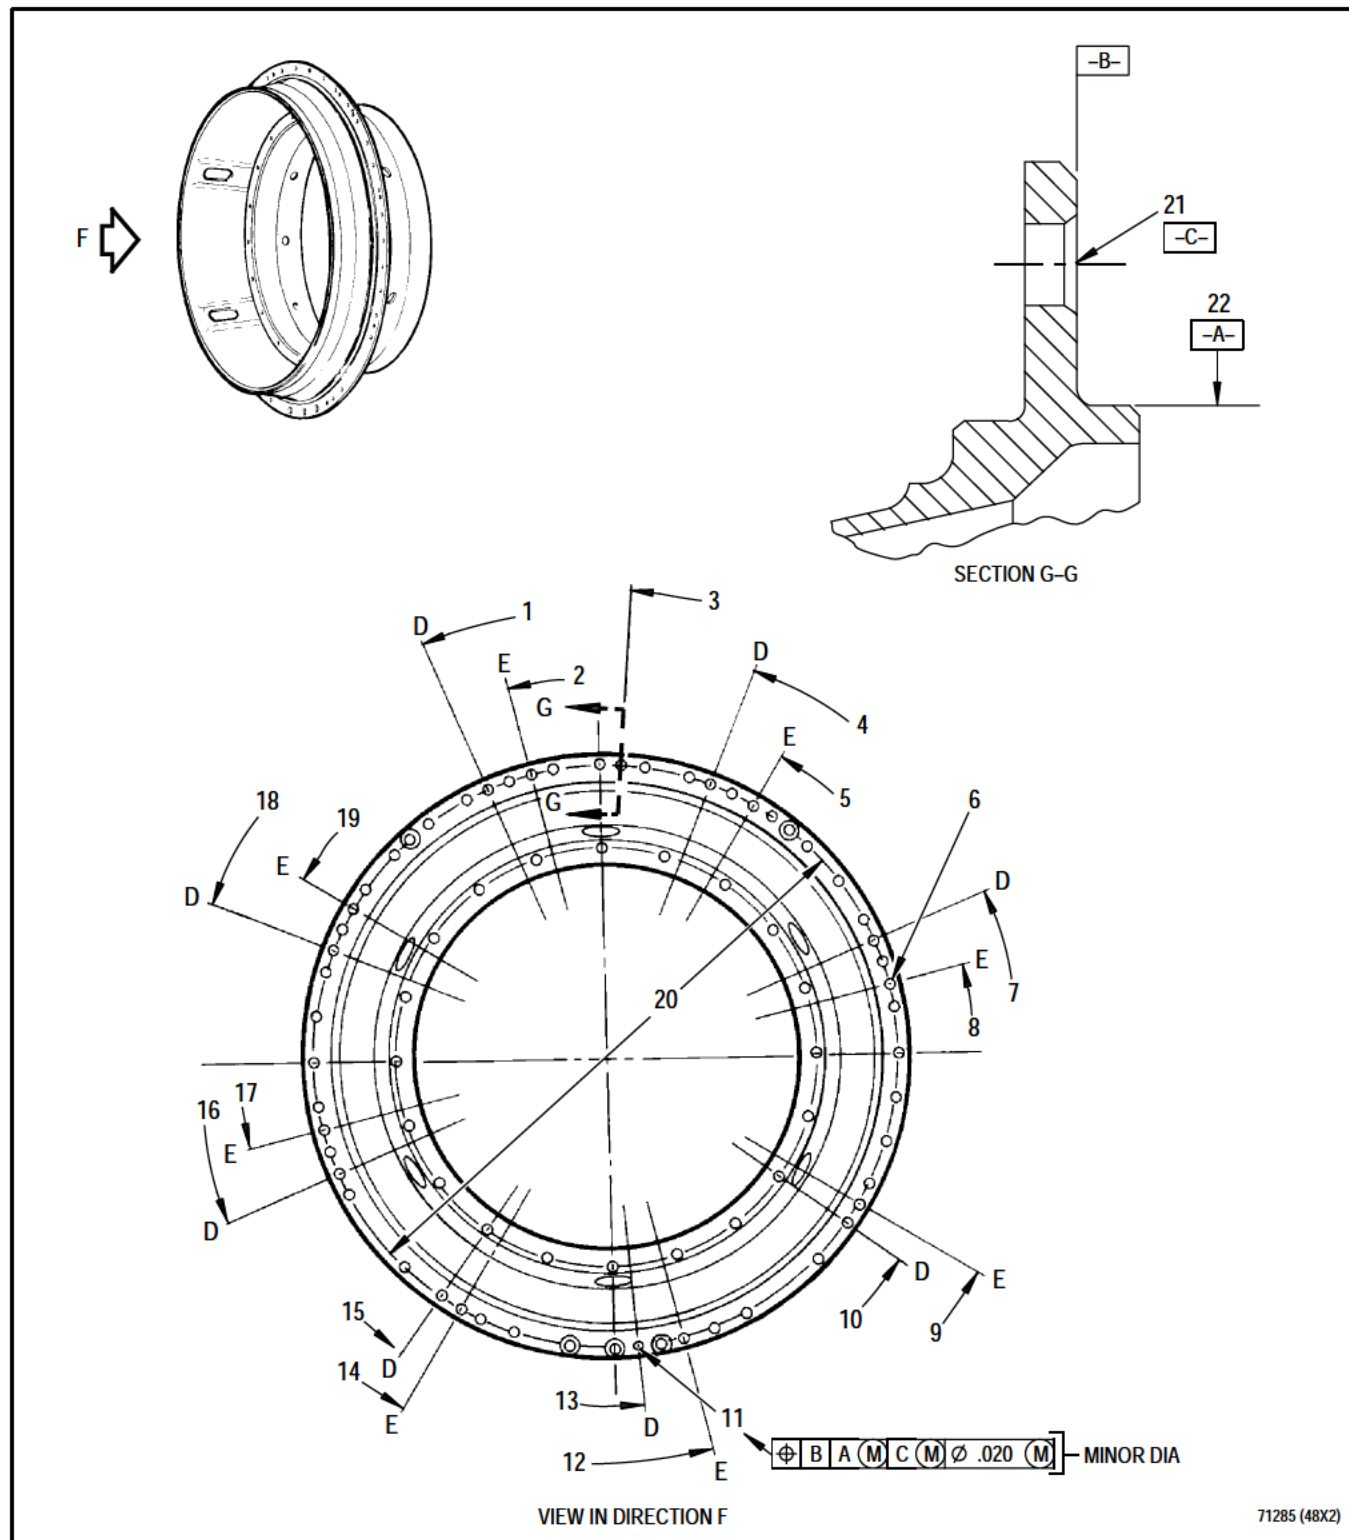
No. 3 Bearing Support Assembly - Jackscrew Hole Repair
